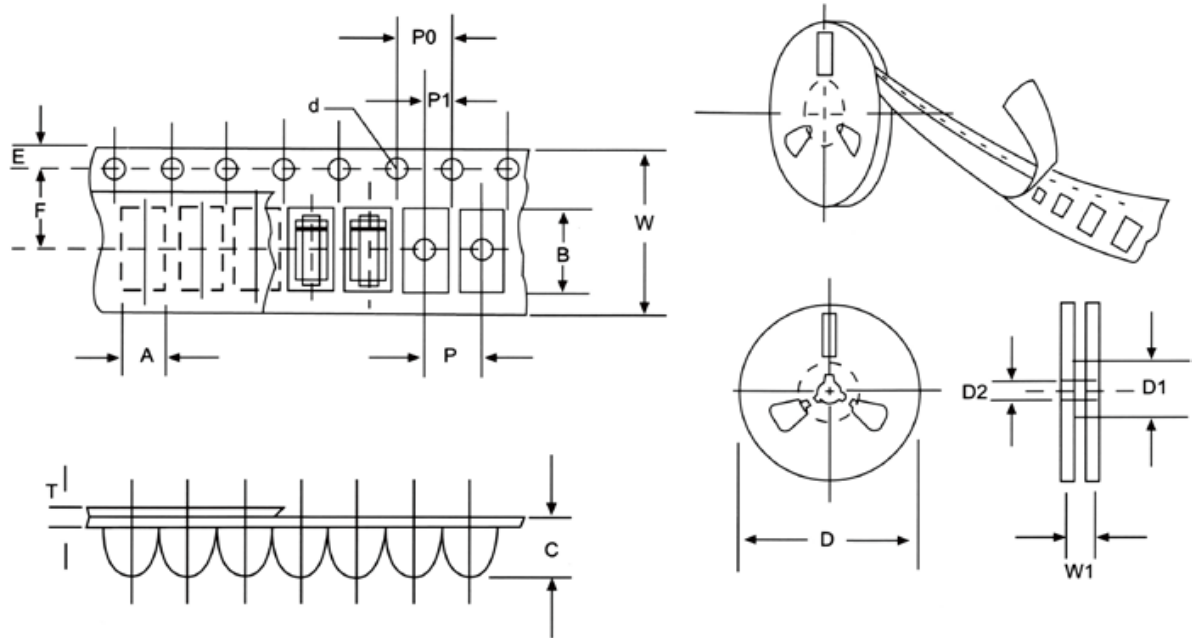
FIG: CONFIGURATION OF SURFACE MOUNTED DEVICES TAPING
